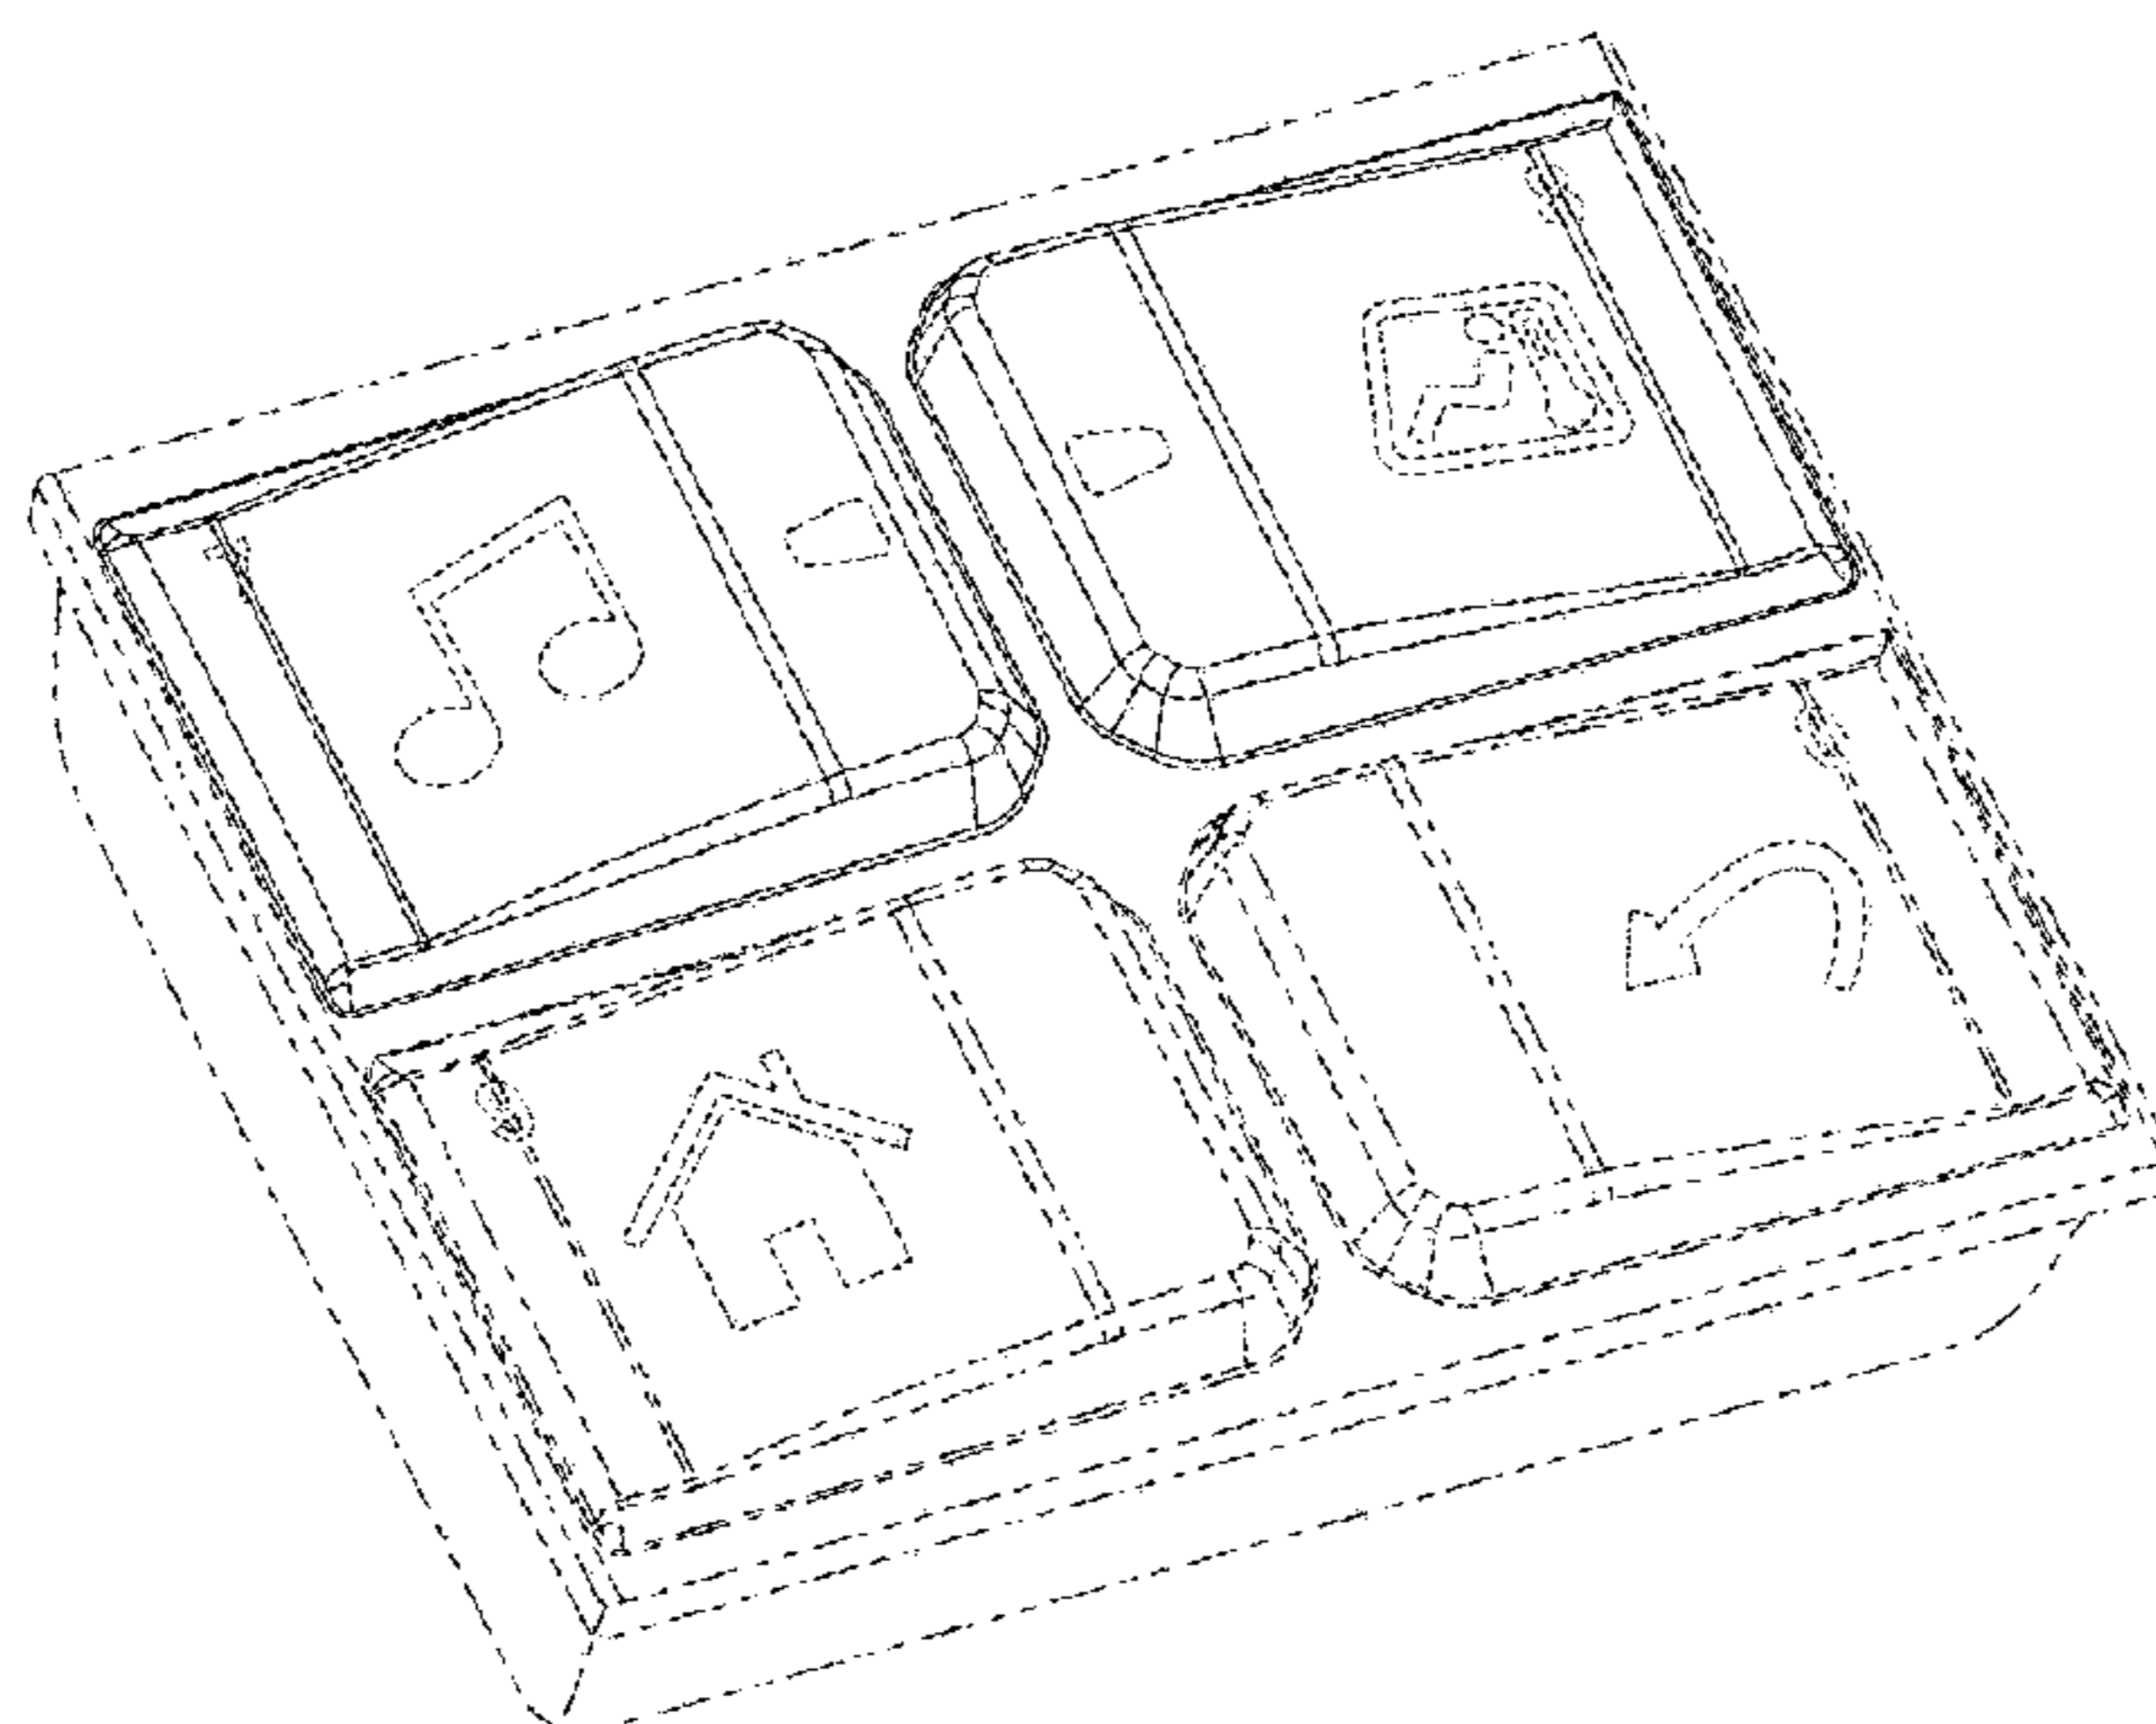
is a perspective view of a button for a switch panel user interface showing our new design;
